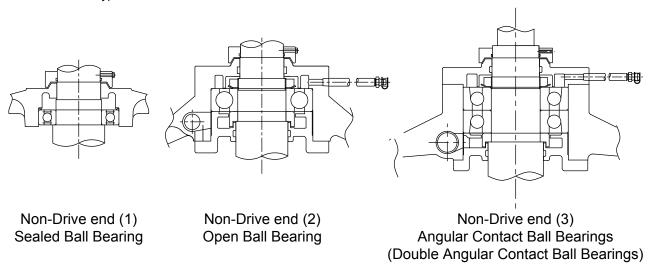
Bearing construction grease lubrication type (Frame size 250S to 630, Belt drive)
